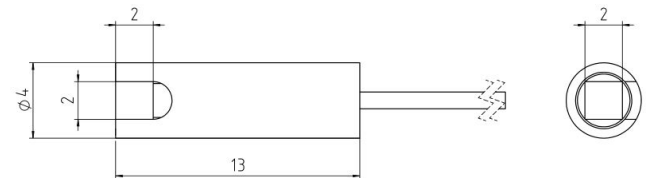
CAD drawing of the sensor head C04 (General tolerances: ISO 2768-fH).
